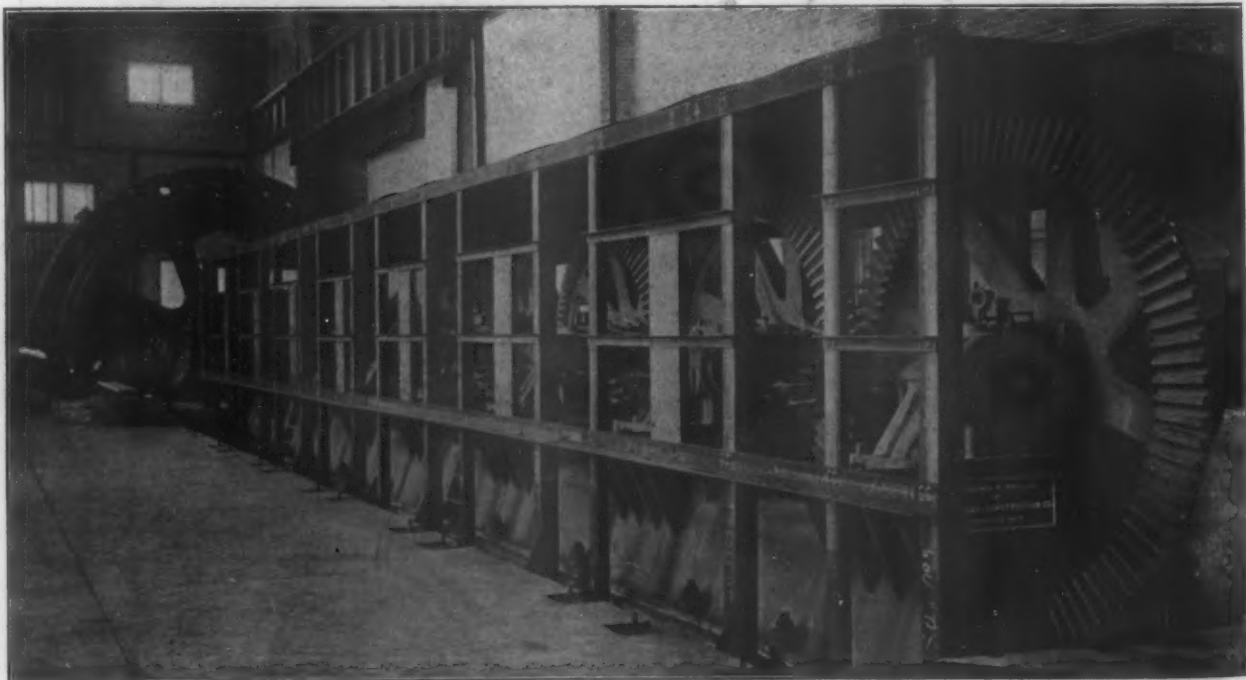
Driving Motor and Bevel Gear Drive for the Gary Sheet-Bar Mill.
